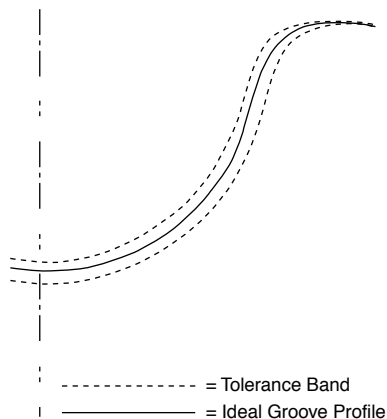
Typical Pulley Groove Tolerance Band
